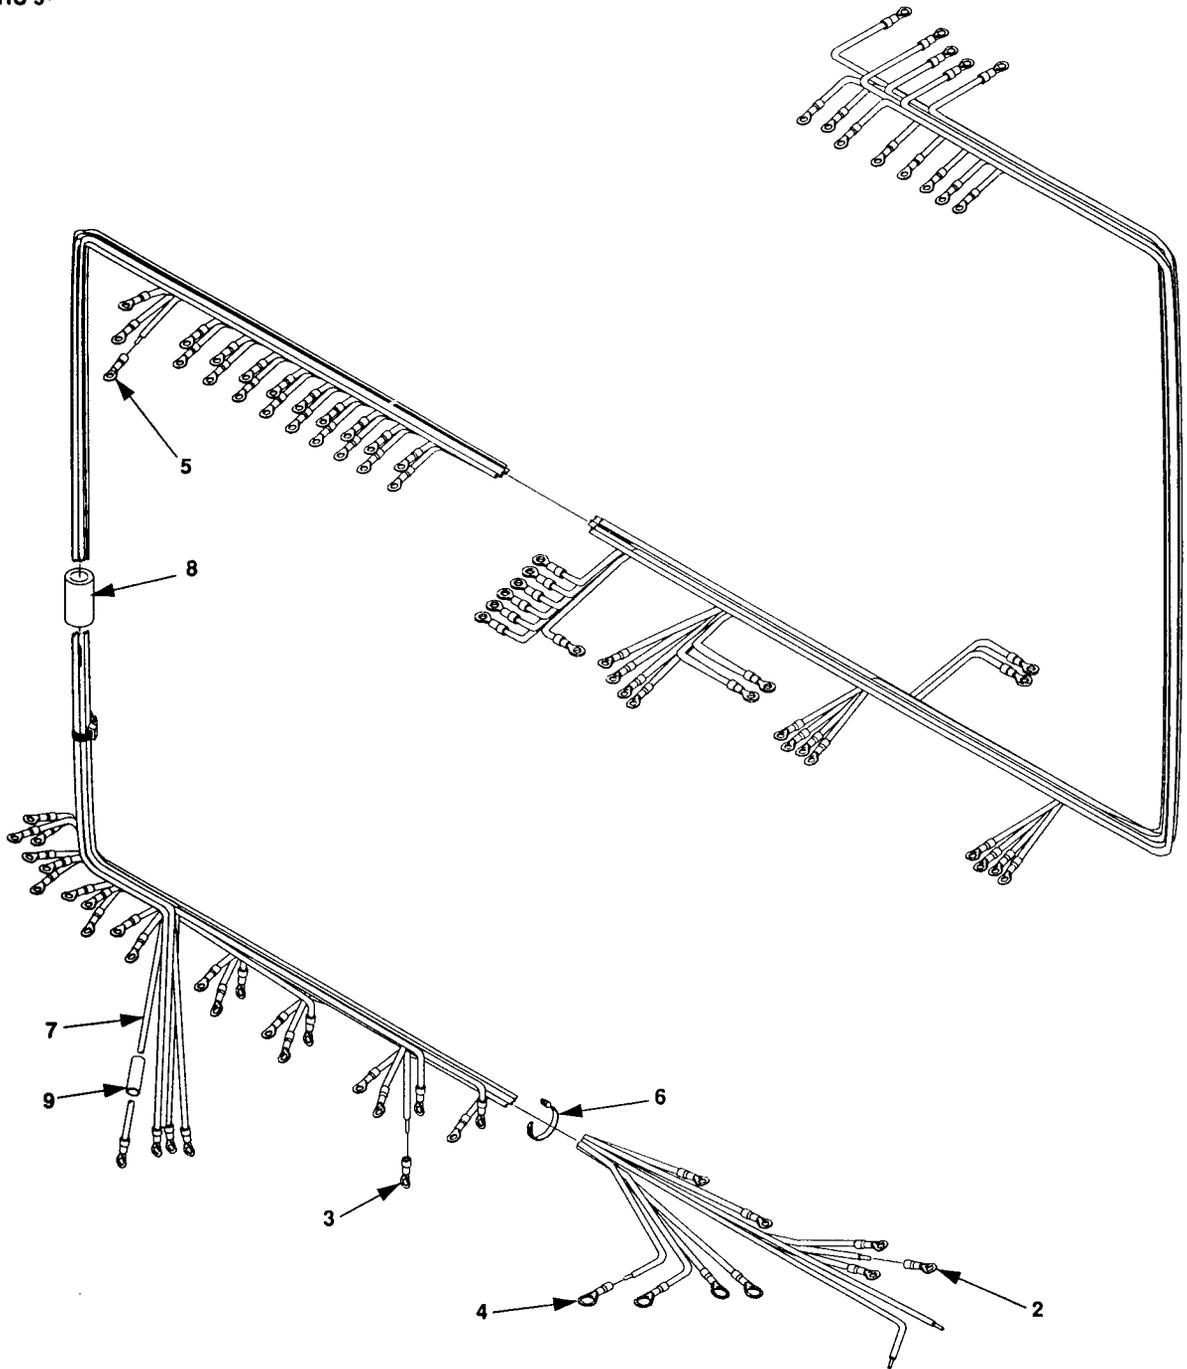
Switch Box Harness Assembly (Sheef 1 of 2)
